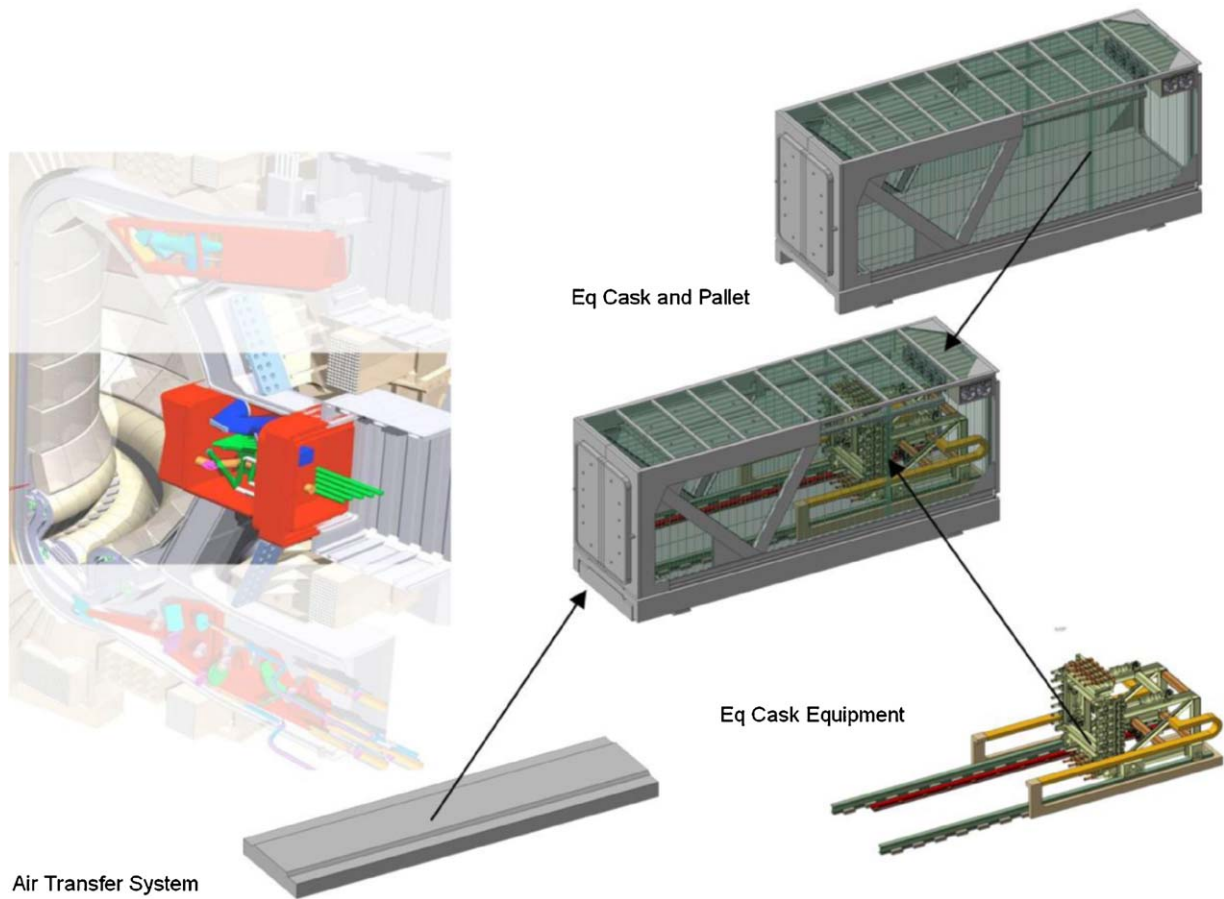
Equatorial cask and plug handling equipment main components and layout.
